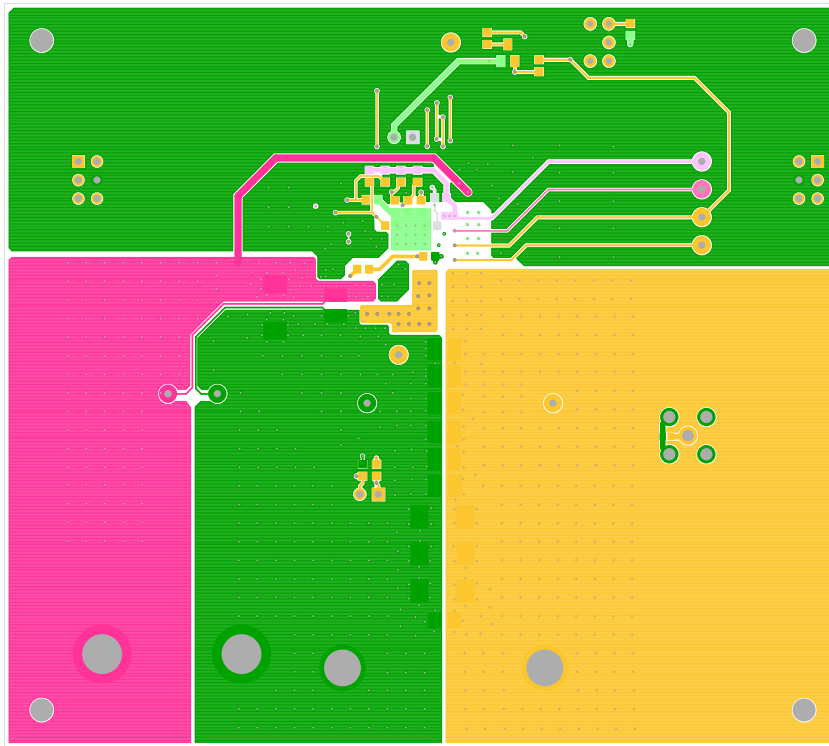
PCB - Bottom Layer Solder Side (Bottom View)
